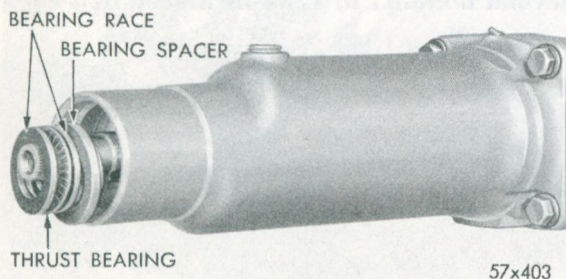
Removing or Installing Bearing Race, Bearing and Spacer
